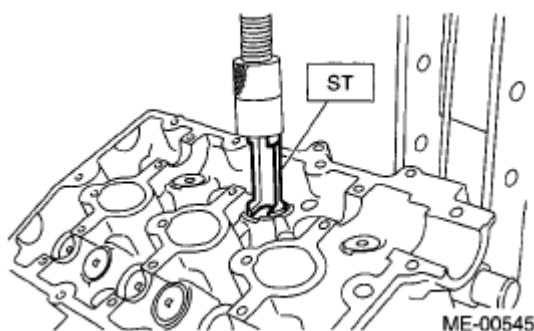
Identifying ST 499718000 Valve Spring Remover
